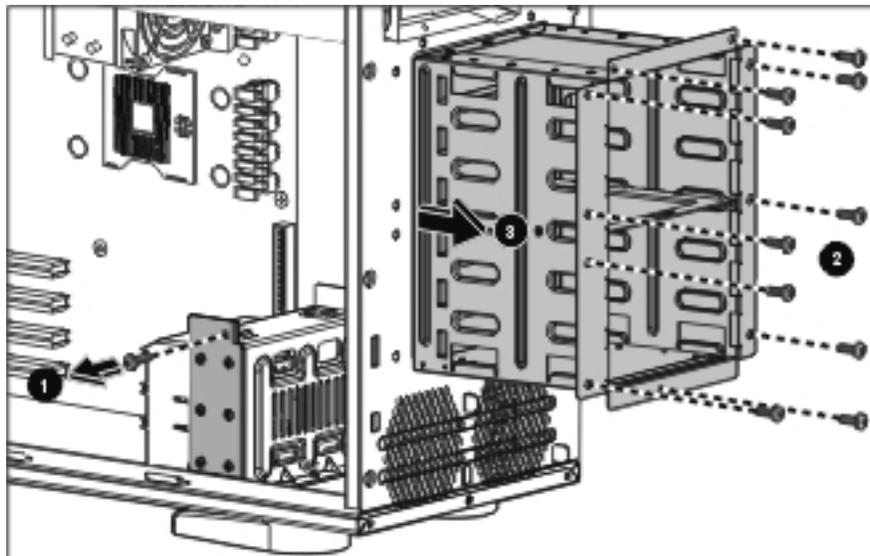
Removing the SCSI non-hot-plugin hard drive cage
